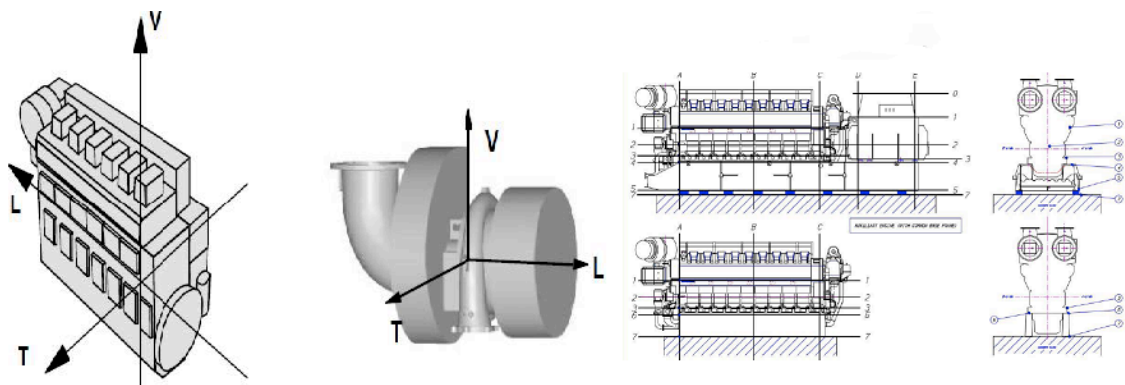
Shaft positions and vibration measurement points in an internal combustion engine [13]
